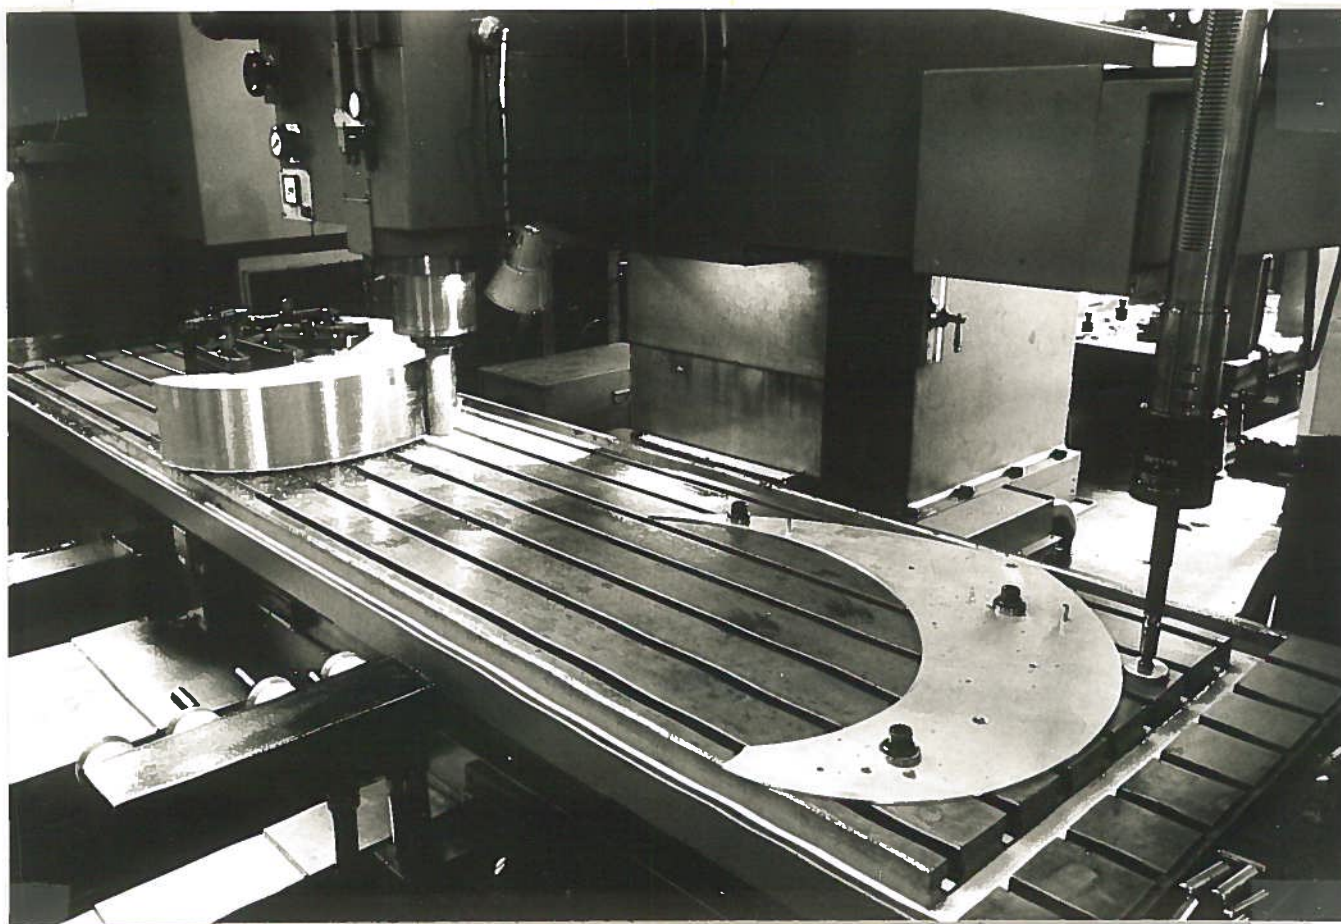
View of a sector during rough machining of the profiles with a copying milling machine.
